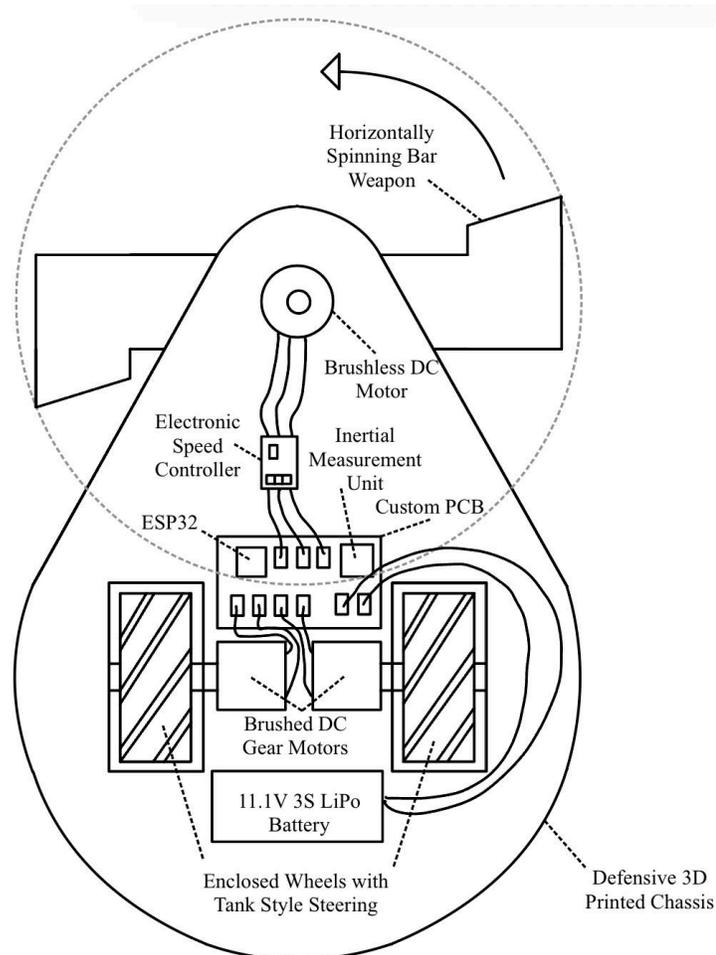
Physical Design of the Invertible Control Antweight Battle Bot. This diagram illustrates the internal layout of all primary components, such as the motors, battery, and custom PCB.
